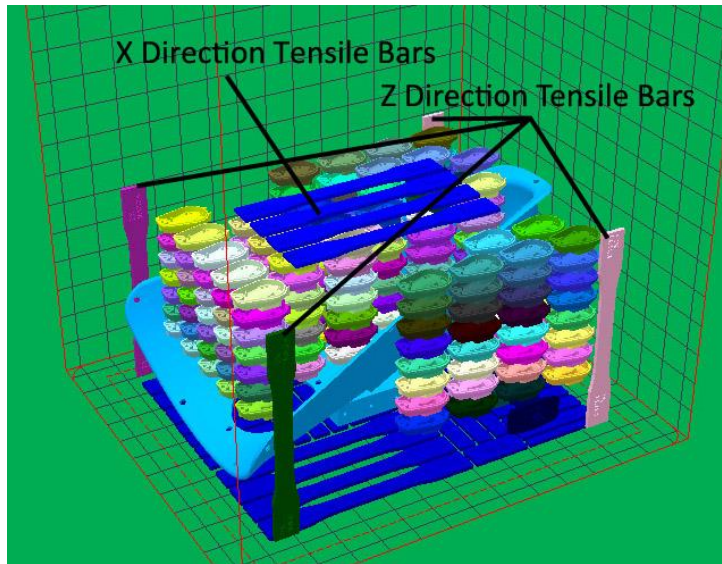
Tensile Specimen Location in Build (Leigh, Fracture Behavior in Laser Sintering, 2011)
